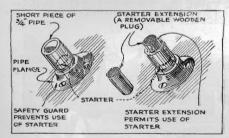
A pipe flange fitted over starter, with plug to work it, makes car safe for children.
